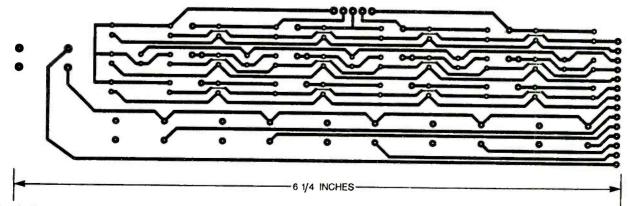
Here's the foil pattern for the display board. The board is shown here full size.
